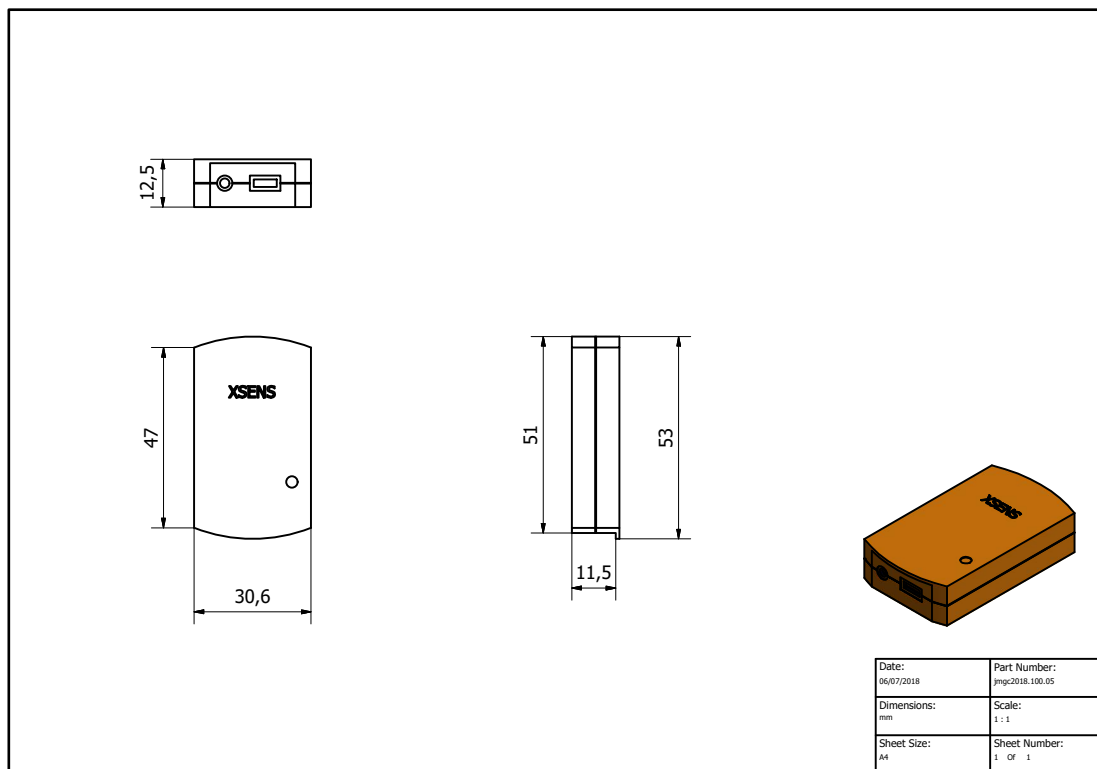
Technical drawing of the Xsens MTw Awinda sensor.
